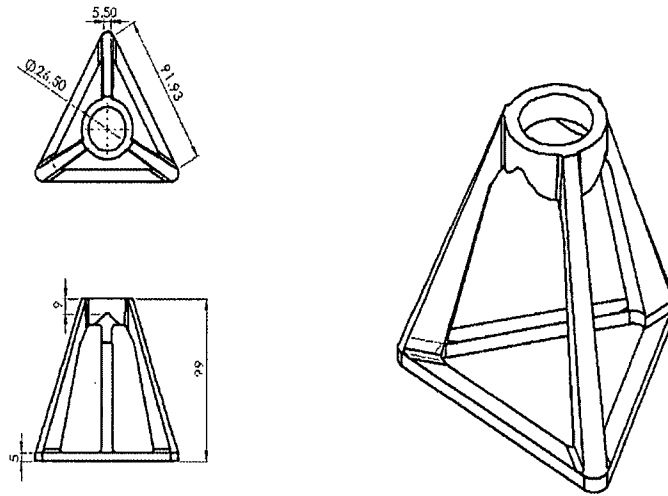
The base of the spin table, showing the supports and the ring for holding the electric motor. All dimensions are in mm.
